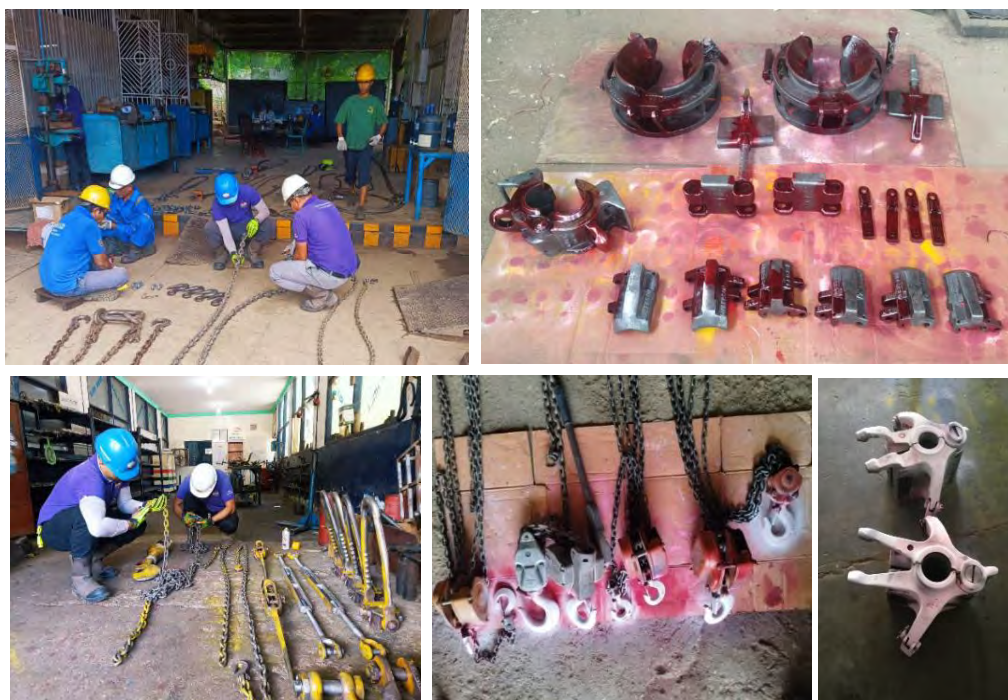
Lifting Gear, Hoisting & Handling Equipment
